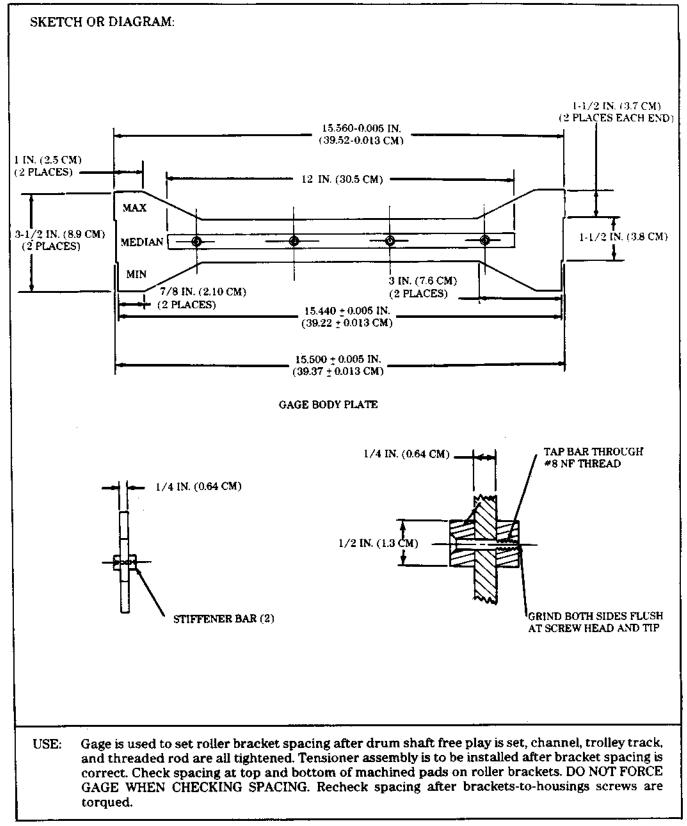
Front Winch Roller Brackets Spacer Gage (Contd).
